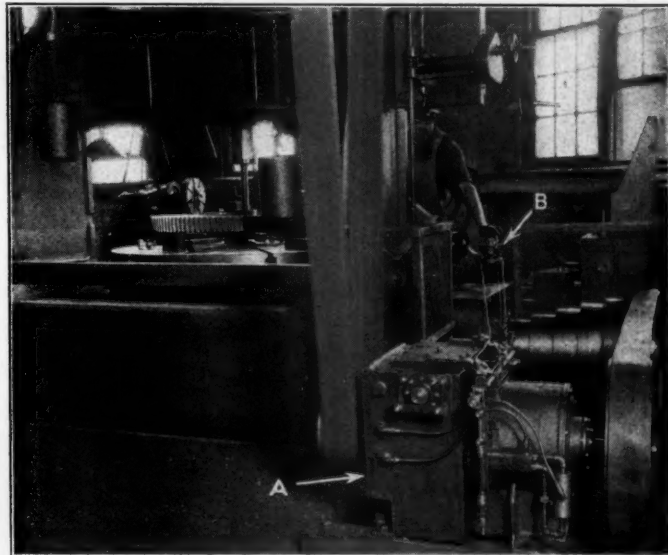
Rear View of 7-Ft. Boring Mill Equipped with Oilgear Variable Speed Drive
